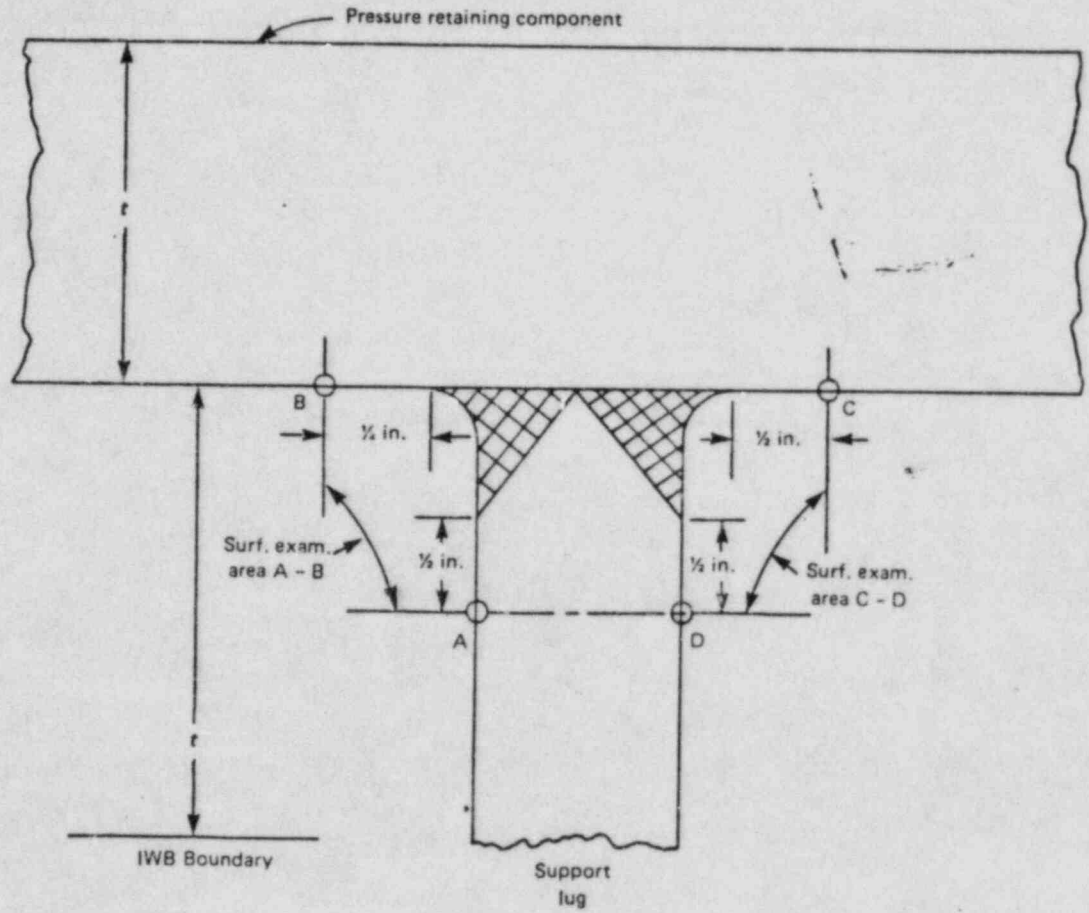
INTEGRAL ATTACHMENT
